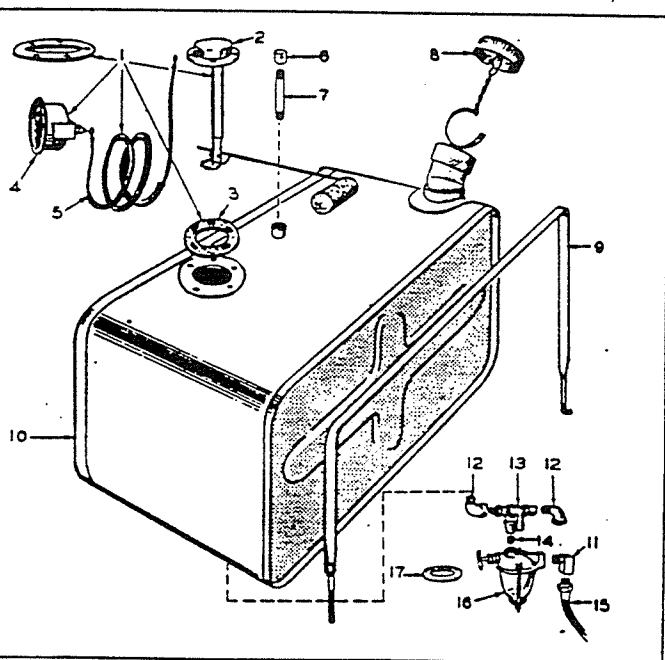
MOUNTED FUEL TANK GROUP - HOUSED PLANTS ONLY
